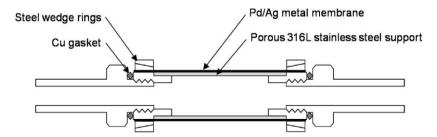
Example of a tubular membrane module shown schematically. The tube diameter is 12 mm and the active length is about 20 mm.
